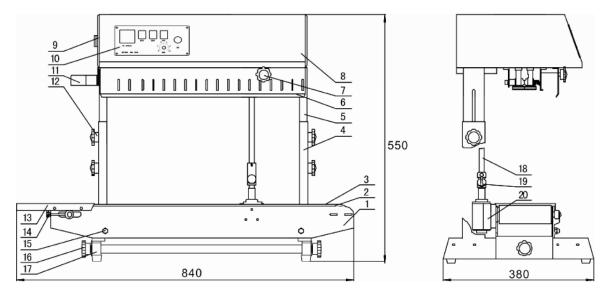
Vertical Band Sealer (1) Conveyor Table, (2) Driving Roller, (3) Conveyor Belt, (4) Fixed Bracket, (5) Slip Bracket, (6) Safety Cover, (7) Adjusting Knob for Embossing Roller, (8) Housing, (9) Circuit Breaker, (10) Control Panel, (11) Feed Opening, (12) Fastening Knob, (13) Working Table, (14) Adjusting Knob for Conveyor Belt, (15) Tightening Nut, (16) Transverse Tightening Knob for Conveyor Table, (17) Conveyor Support, (18) Vertical Shaft, (19) Gimbel Assembly, (20) Umbrella Gear Shaft
